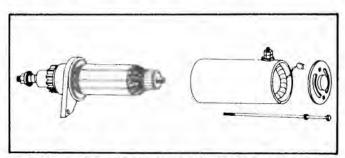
STARTER DISASSEMBLY (SPEC. A)
